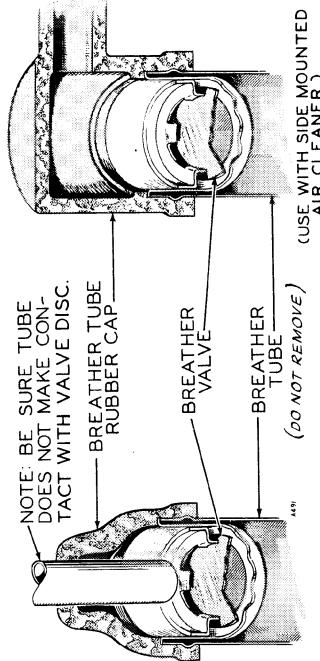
SERVICING THE CRANKCASE BREATHER
